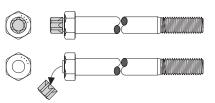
TORQ-RITE<sup>®</sup> shear-type hex-head bolt
